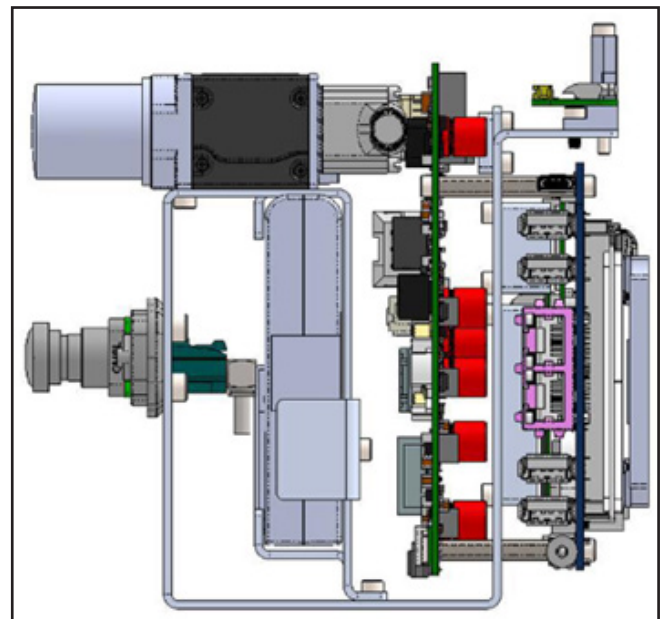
Side View of Exploded Unit Used in Offshore Applications and Exposed to Air and Seawater
